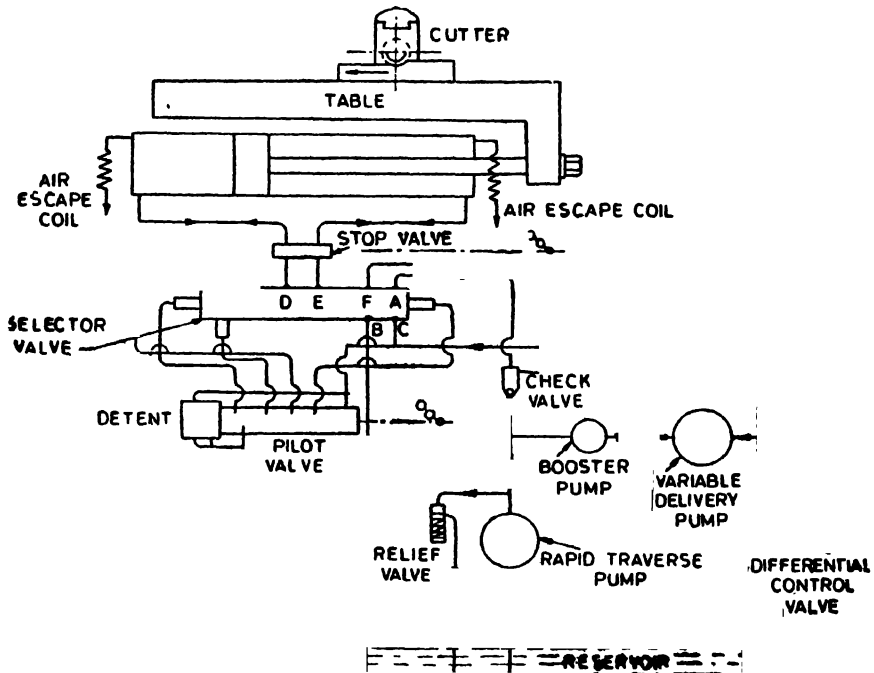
Locked Hydraulic Circuit of Hydromatic Milling Machine (Cincinnati)
